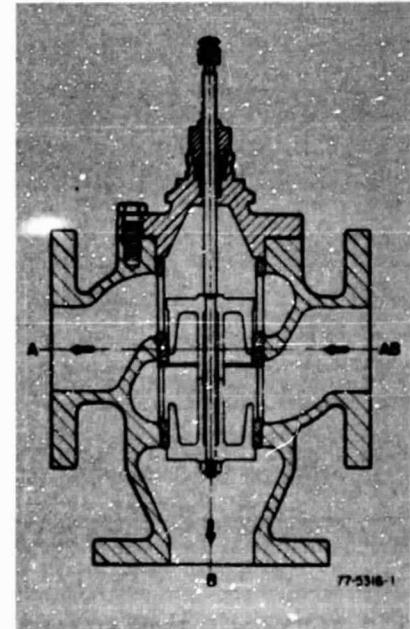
V5013C & E THREE-WAY DIVERTING VALVE
